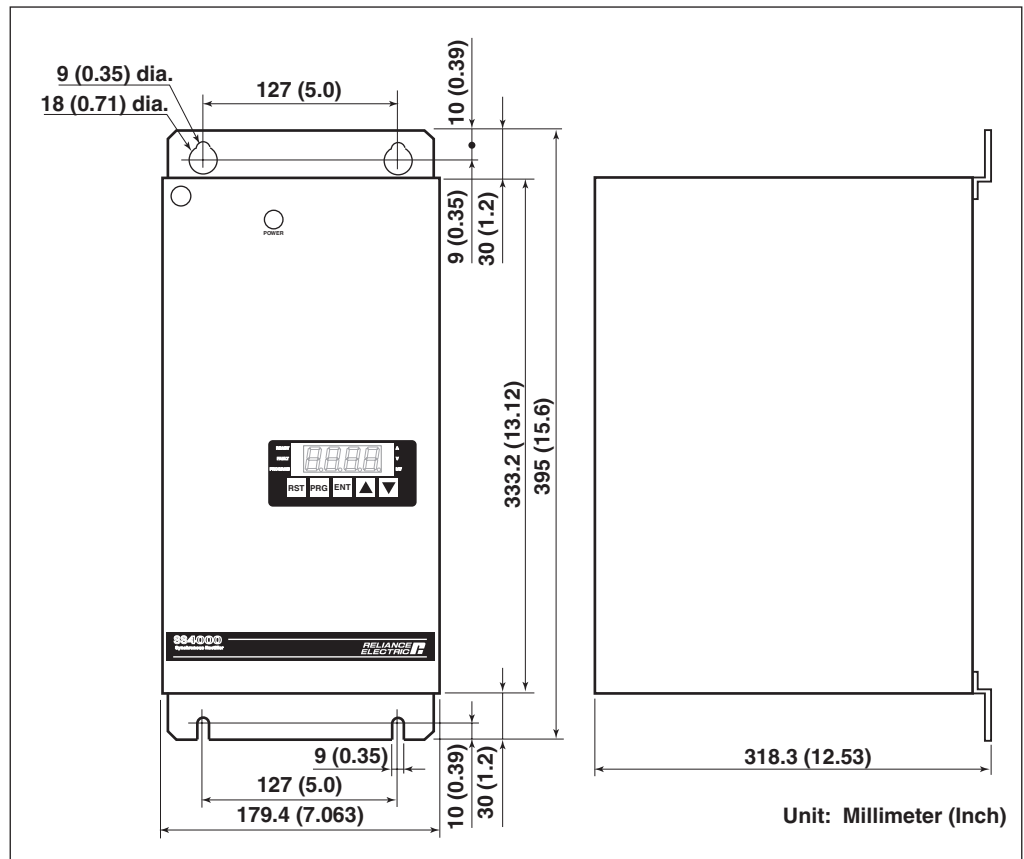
Dimensional Outline Drawing of the SS4000 Power Regenerating Unit
